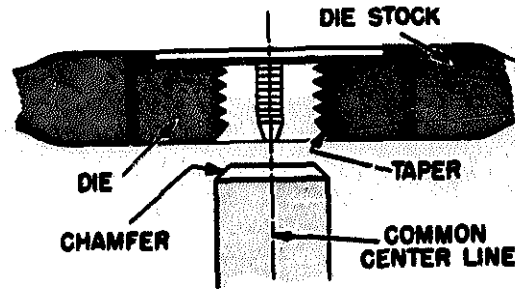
The correct position of the die stock in relation to the chamfered end of the work when external threads are cut.
